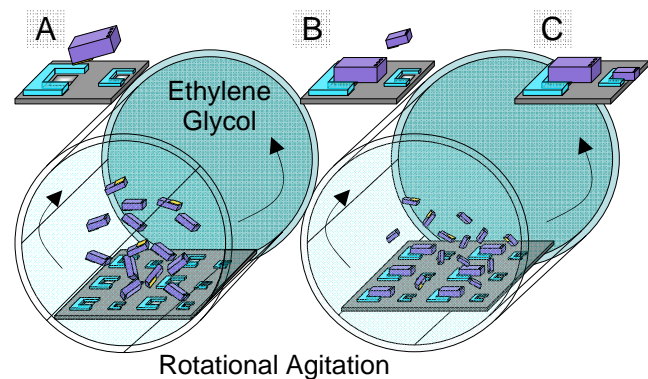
illustrates the basic concept of solder directed self-assembly (Figure 1A) introducing alignment pedestals and contact pad layouts with increasing complexity. The layout shown in Figure 1B prevents assembly of more than one component type onto a single receptor, while the layout in Figure 1C enables flip-chip assembly with single-angle orientation and contact pad registration forming multiple contacts to the device: Components can only attach to the solder-coated areas if a correct angular pre-orientation condition is met. Components that arrive at the docking sites with an angular orientation that deviates by more than  $\pm 90^\circ$  from the desired orientation will not find a sufficient overlap between the binding site (contact area) on the components and the solder-coated areas and therefore will not attach. Other components will be captured and aligned due to the reduction of the interfacial free energy.
